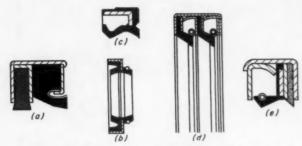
DUAL-ELEMENT SEALS. Seal a combines felt and elastomeric elements. Opposed elements, b, c, are used to seal two lubricants from each other or improve dust and dirt sealing. Tandem element, d, may be either leather or elastomeric. It improves sealing in depth. Unit with leather washer and garter spring loaded elastomeric element, e, gives improved dirt exclusion.
